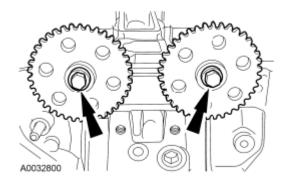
Locating Cam Holding Area And Sprocket Bolt Courtesy of FORD MOTOR CO.
